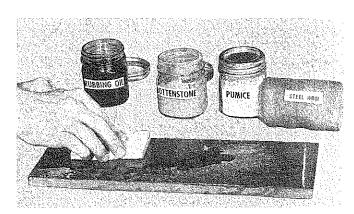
Using rottenstone and rubbing oil to smooth final coat.
